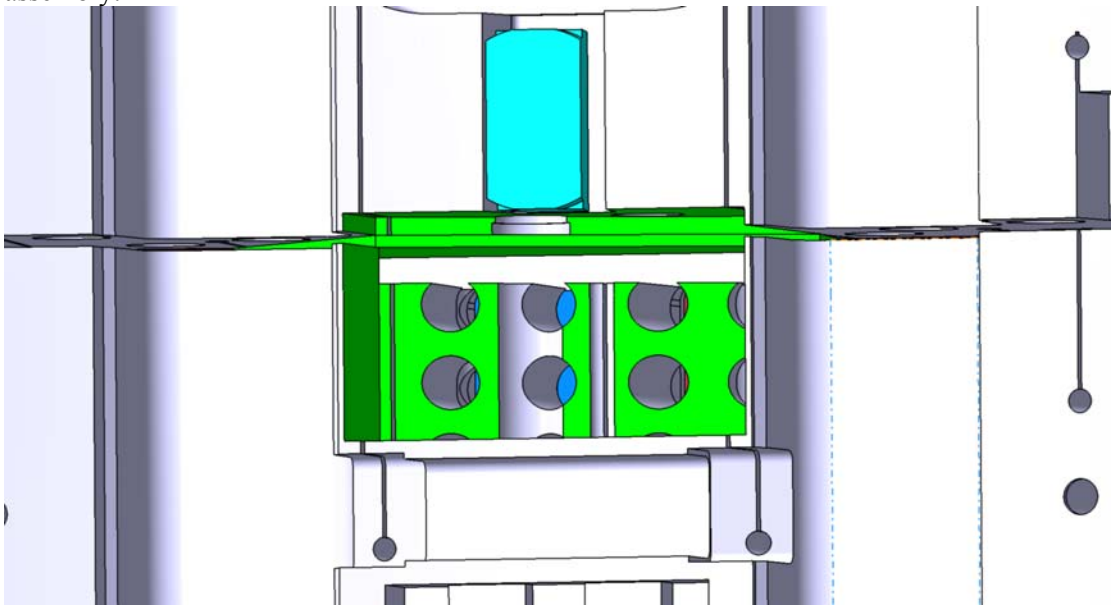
Back view of the blanket. The pocket needed to be cut out is shown in green.
